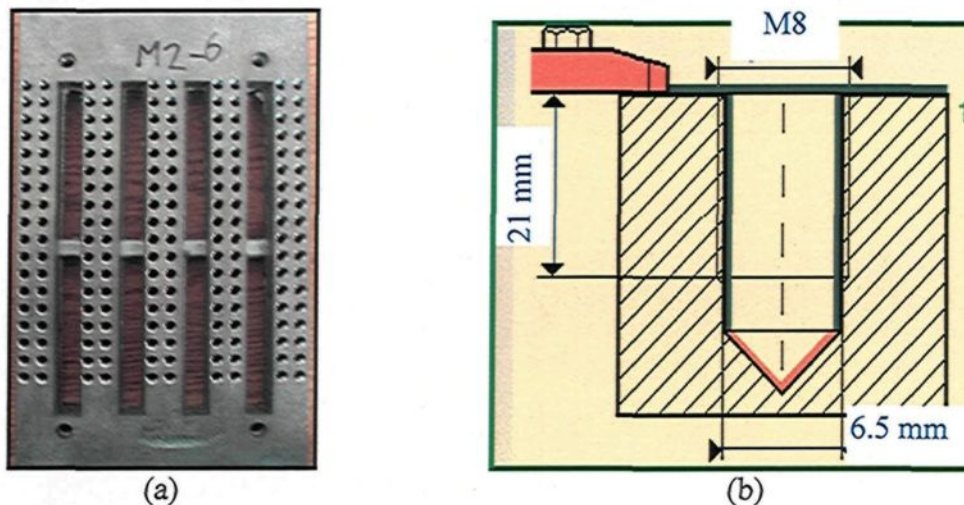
(a) Machinability test block after drilling and tapping; (b) detailed drawing of the tapped hole.
